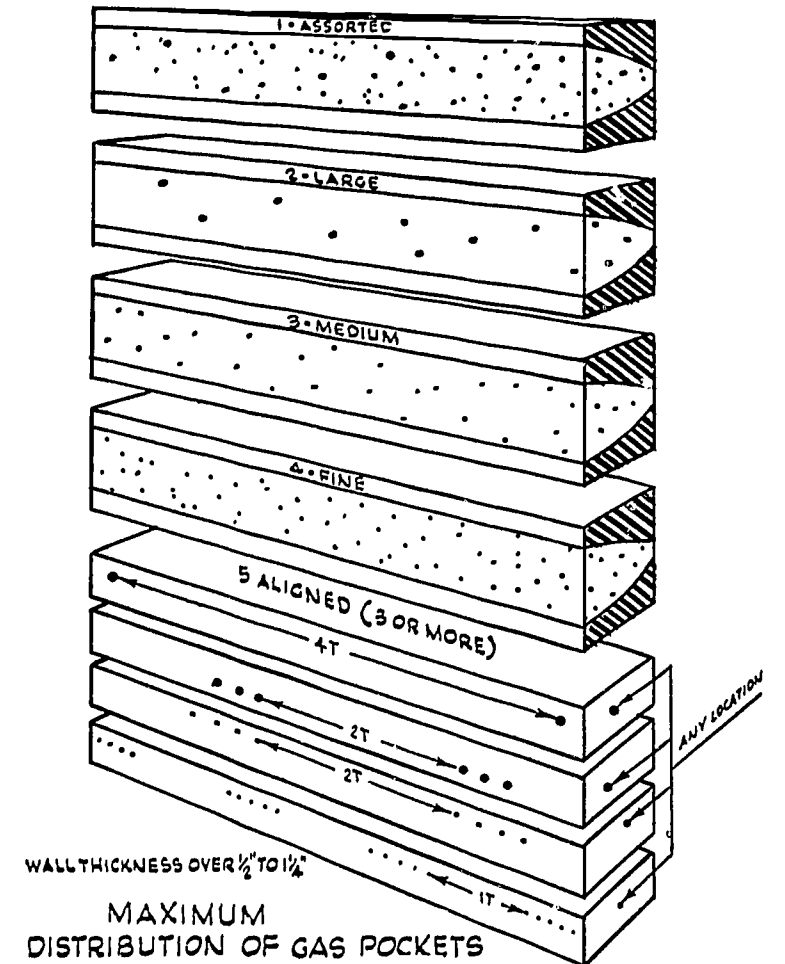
API Standards for Field Welding of Pipelines.
